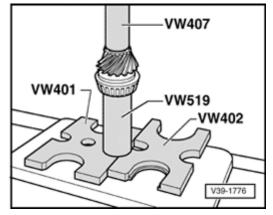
Installing large tapered roller bearing inner race onto pinion shaft
